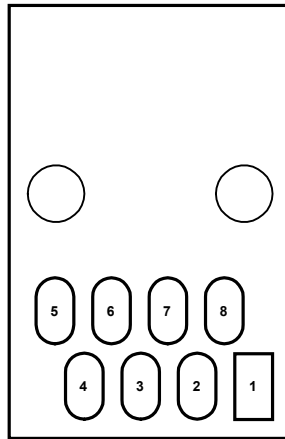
Bottom view pinout on RJ-45 PCB connector
